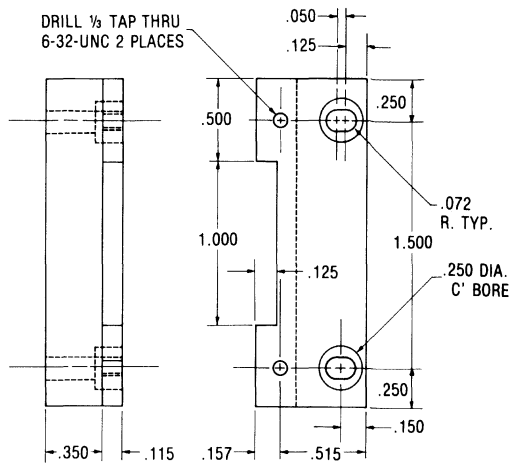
ADAPTER FOR HERMETIC PACKAGE TO STANDARD HYBRID AMPLIFIER TEST FIXTURES
